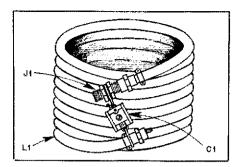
The compact breaker loop assembly. Construction of the assembly is discussed in the text.
